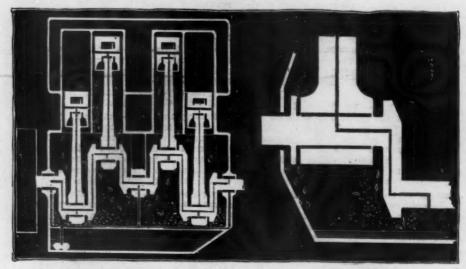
DIRECT PRESSURE SYSTEM PUMP FORCES OIL INTO CRANKSHAFT
